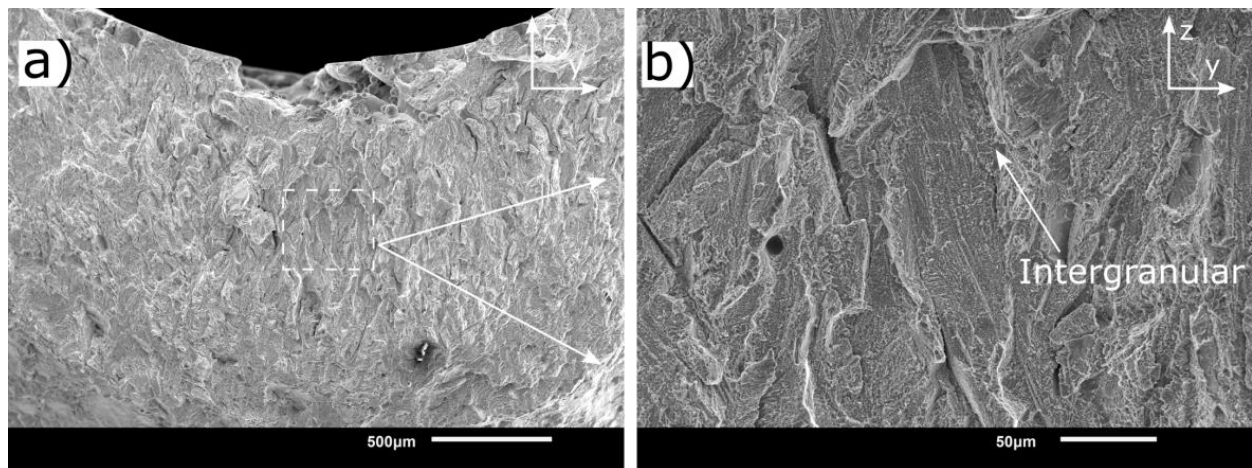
Cross-sectional image of fracture surface showing different modes of failure in conventional Inconel 718.
